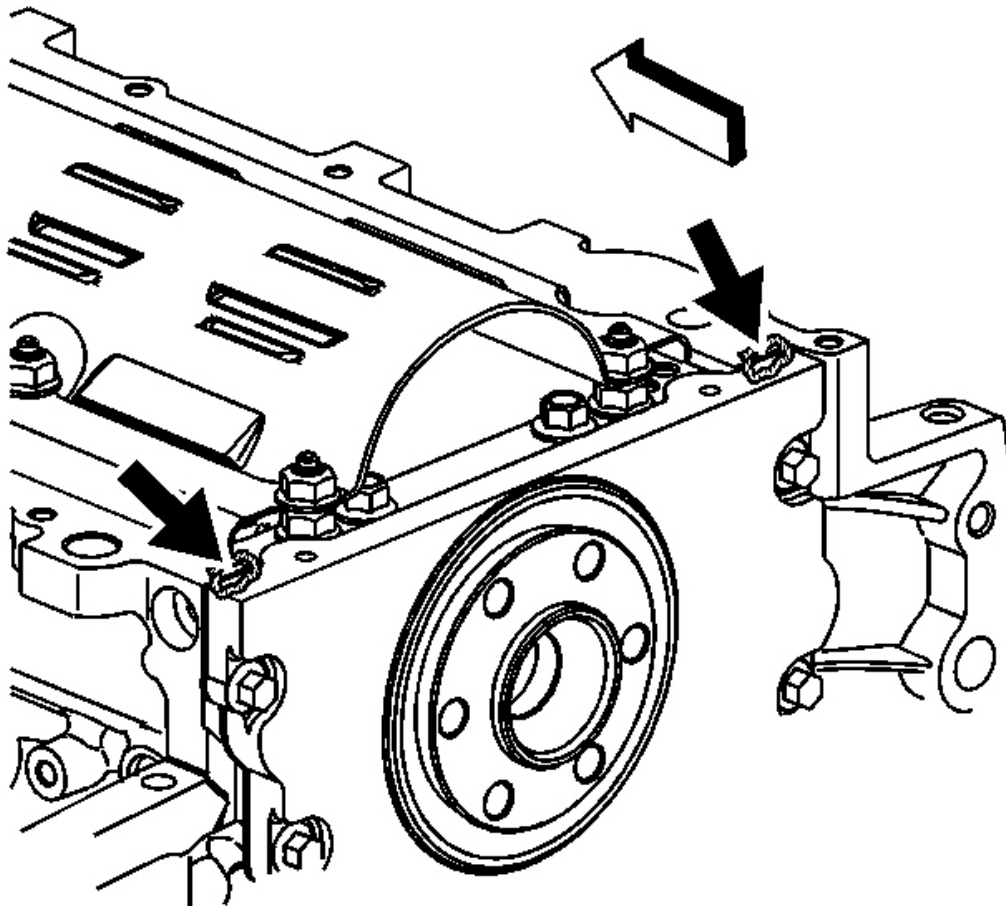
View Of Sealant On Engine Rear Cover Gasket Tabs
